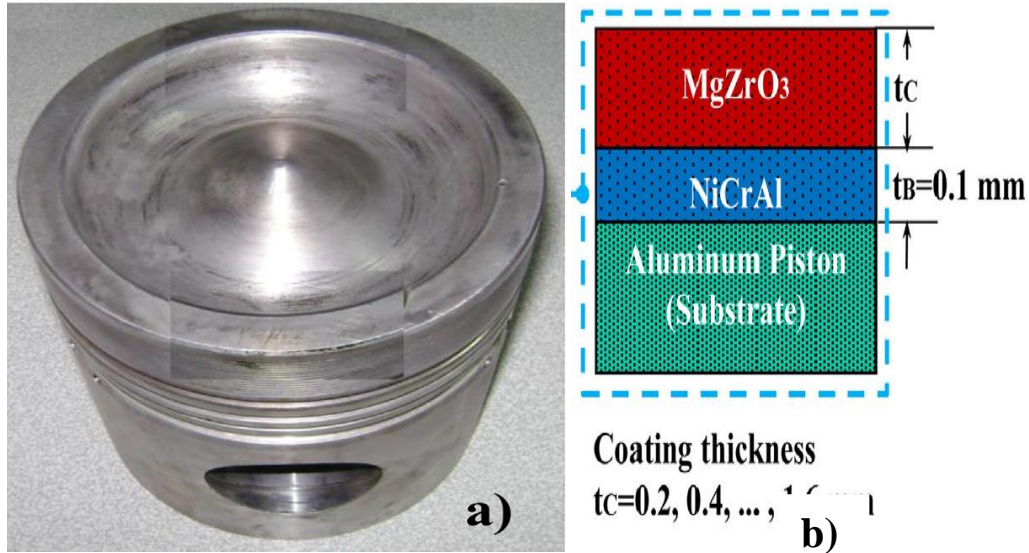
The piston used in the FE analyses: a) photograph of the piston used diesel engine, b) the coating parameters
